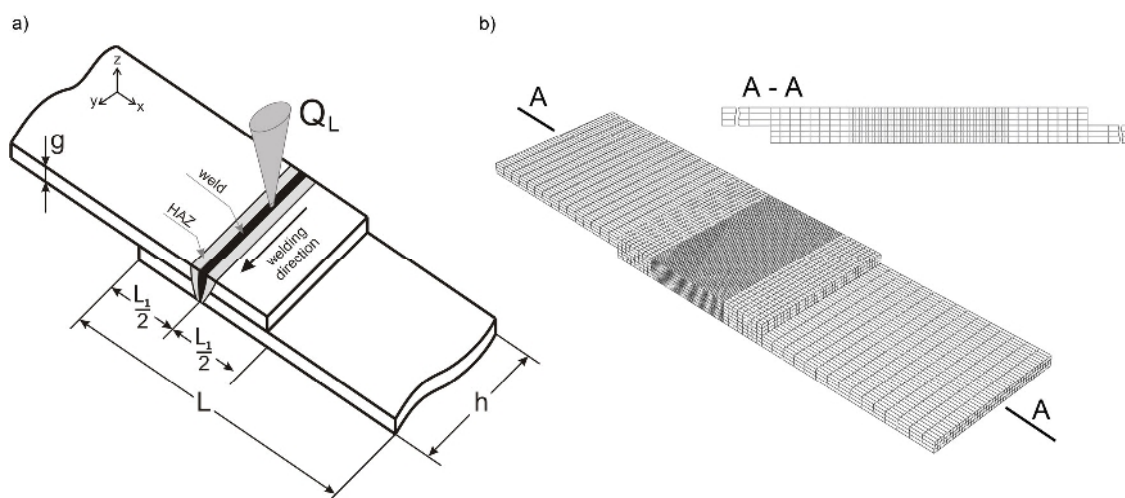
Laser beam welding of lap-joints: a) scheme of considered system, b) finite element mesh
